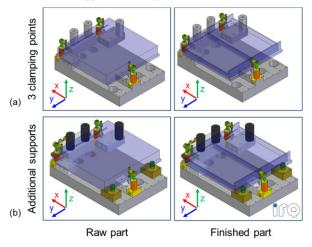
Re-configurable test fixture for exemplary machining experiments; (a) initial fixture setup with three clamping points, (b) configuration with two additional hydraulic supports
